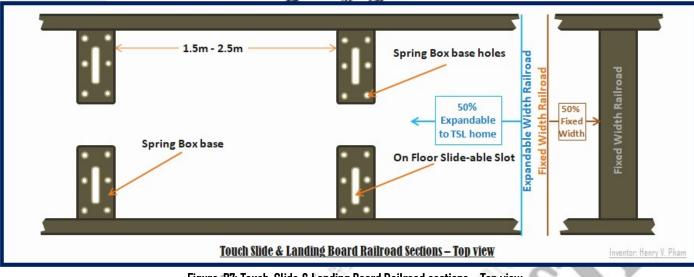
Touch-Slide & Landing Board Railroad sections - Top view
